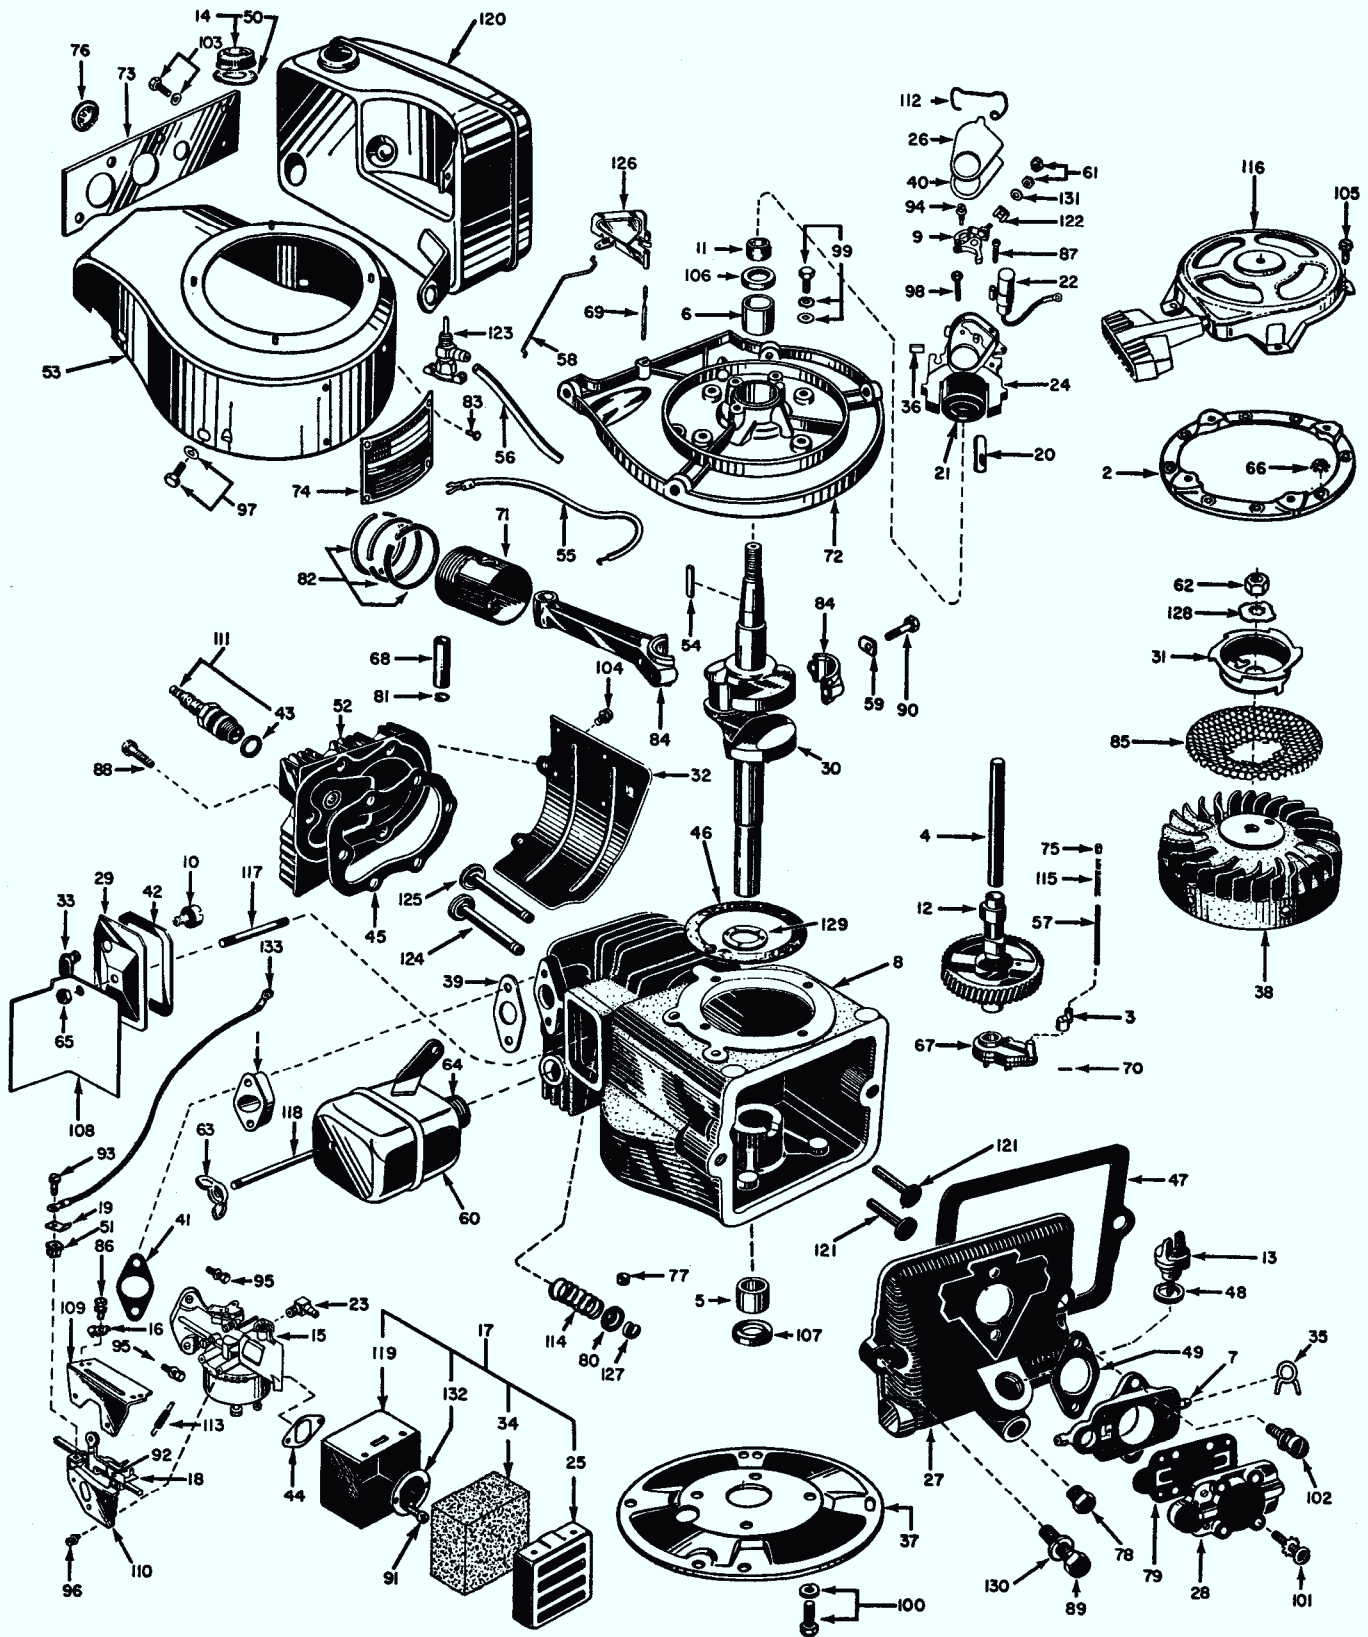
Exploded view of model 499-0000-000 vertical shaft engine. Note the fuel pump (items 7, 28 and 79) which attaches to the crankcase cover (27). Engine is lubricated by oil pump (67) although some vertical shaft models are splash lubricated by an oil scoop riveted to the bottom side of camshaft gear.
